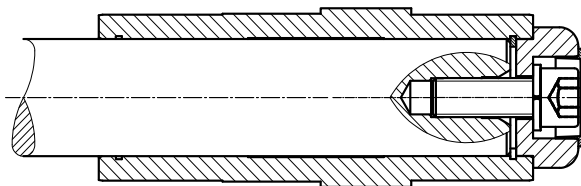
Gear unit mounted to shaft without a shoulder using the fastening element
